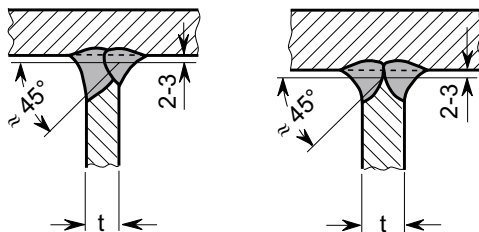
Single- and double-bevel welds with full root penetration
